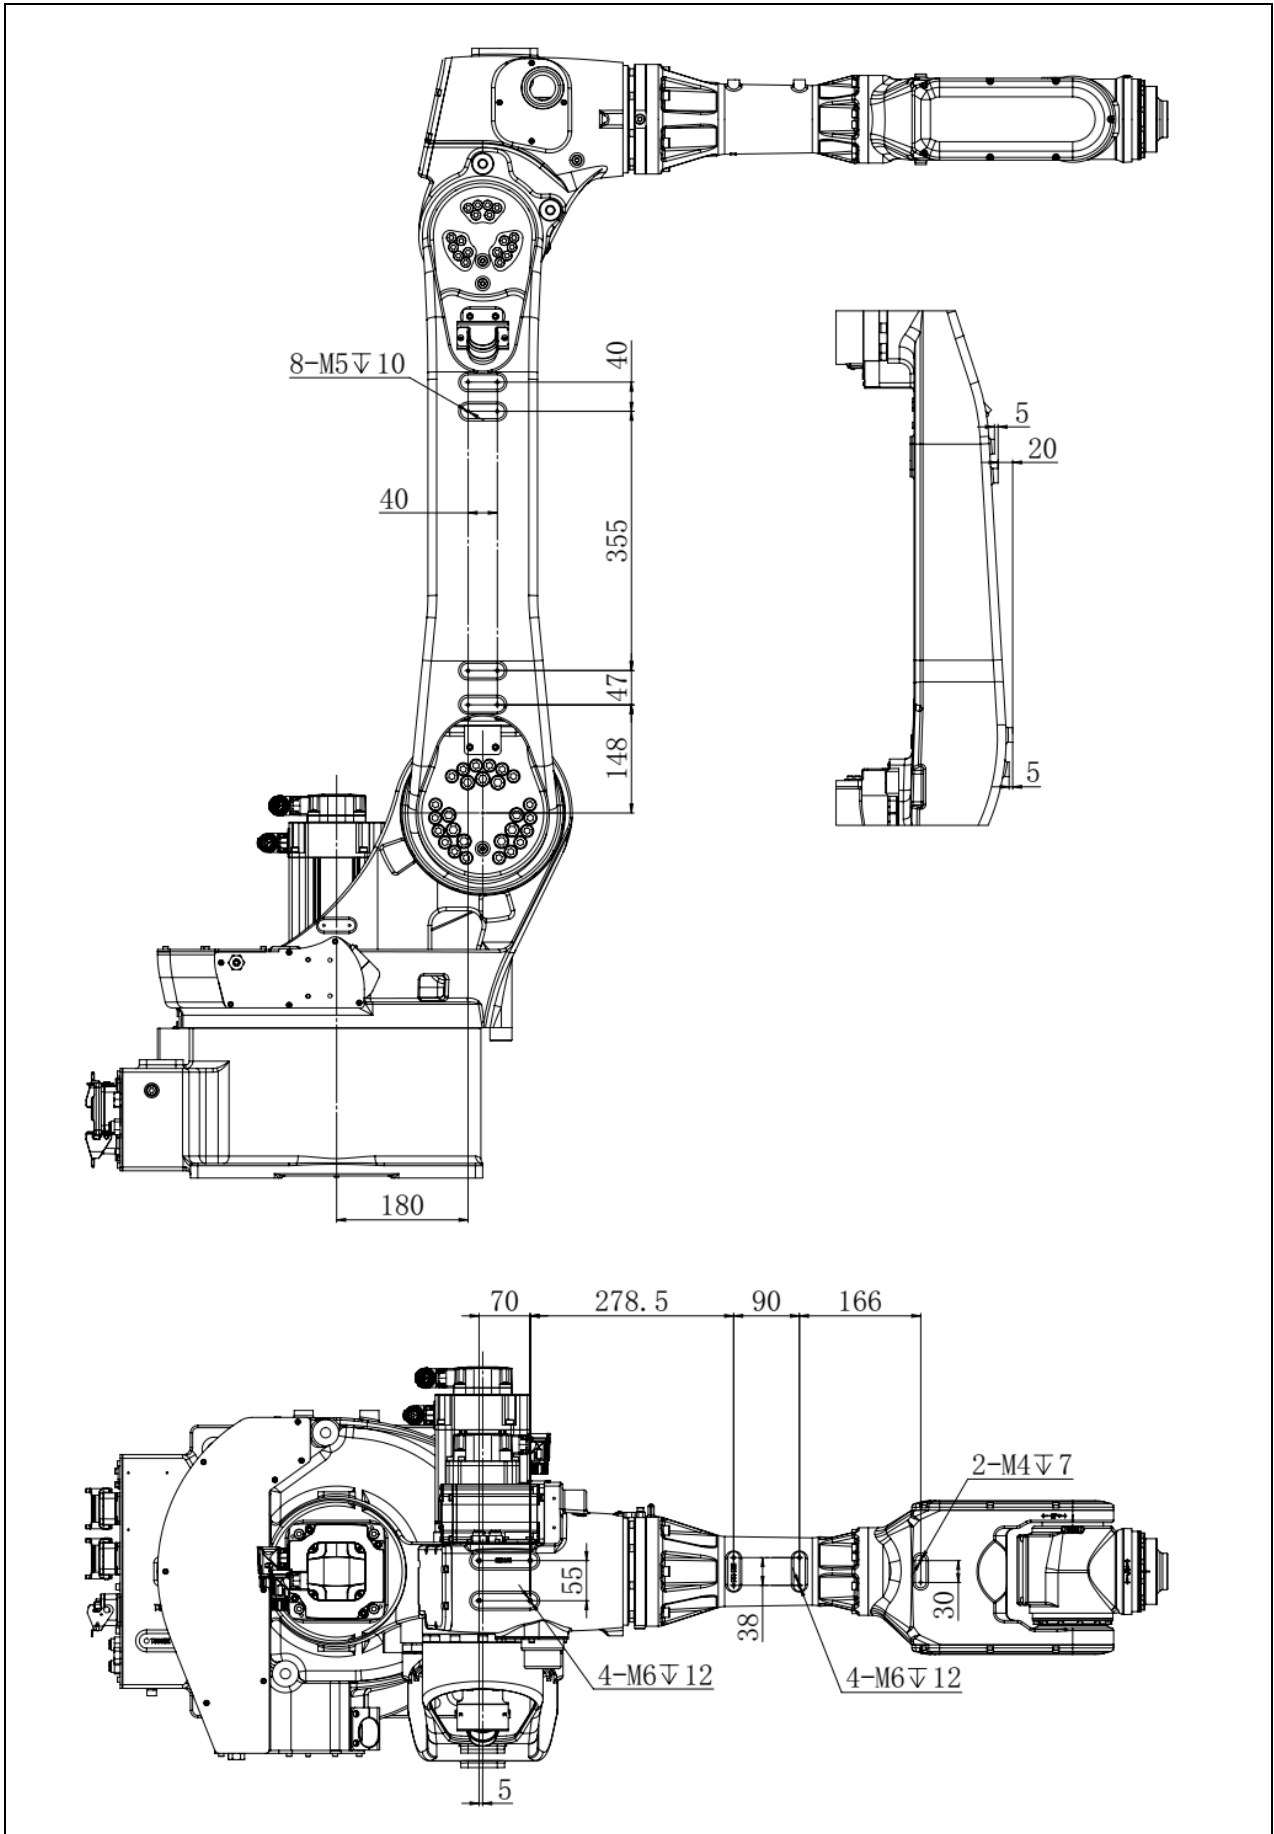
Equipment mounting face (ER35B-1810-LI, ER35B-1810)
